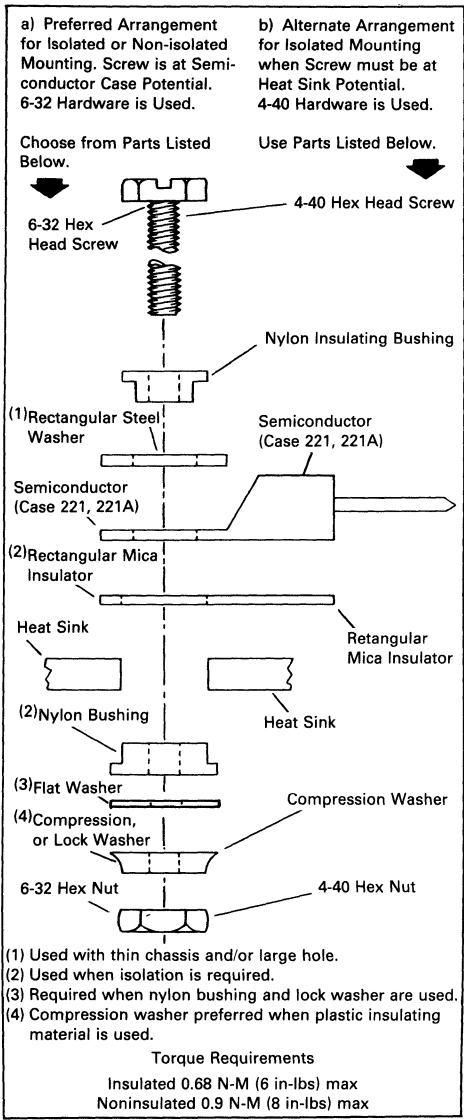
MOUNTING ARRANGEMENTS FOR THERMOWATT PACKAGES (TO-220)
